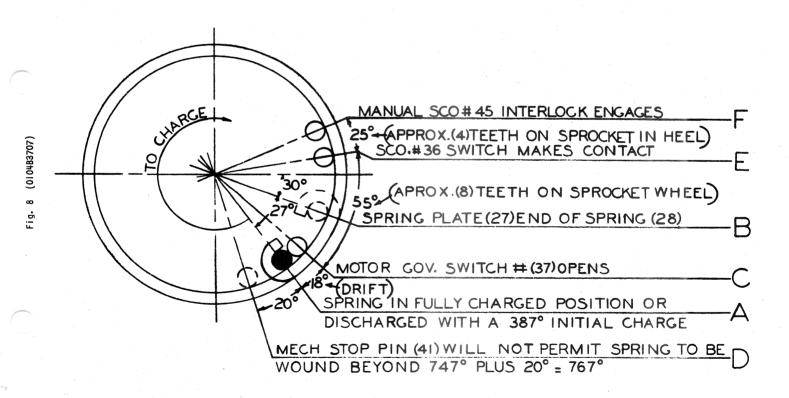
Looking at the End of the Closing Spring from the Motor Support Bracket End
